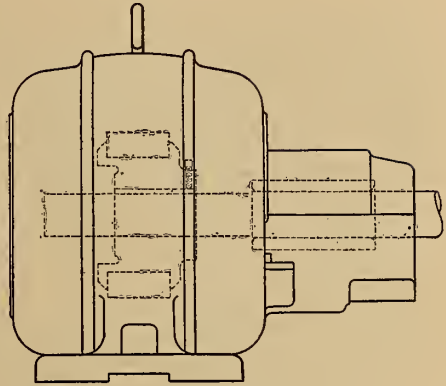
SPECIAL WESTINGHOUSE PICKER MOTOR WITH PICKER BEARING AN INTEGRAL PART OF MOTOR
